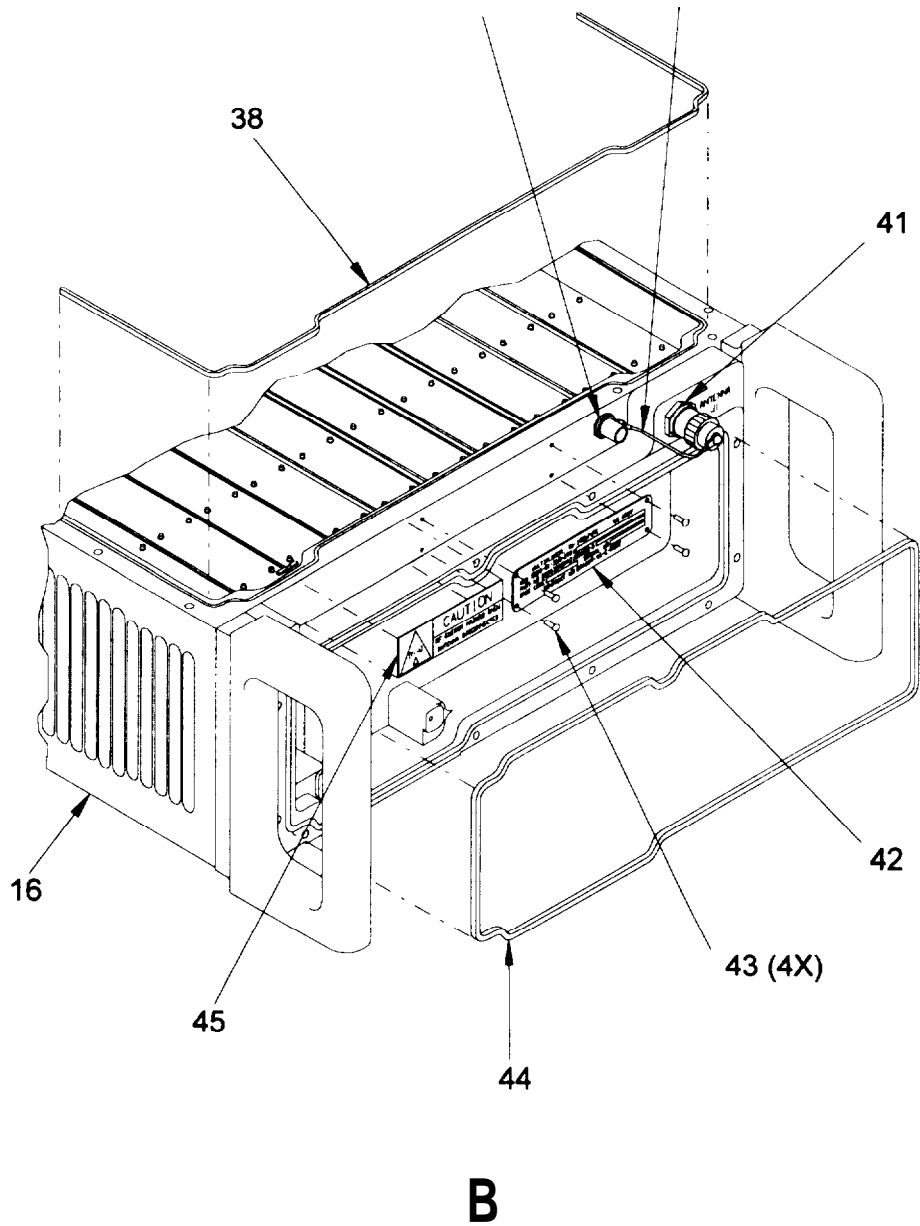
Matrix Paraplex Assembly (sheet 3 of 5)
